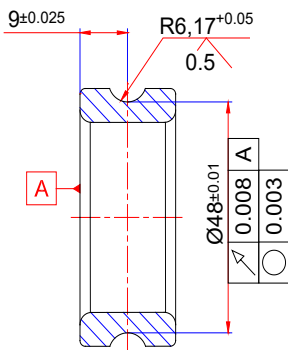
Drawing illustrates technical requirements of the finish grinding operation for 6208 ball bearing's inner ring groove [8]
